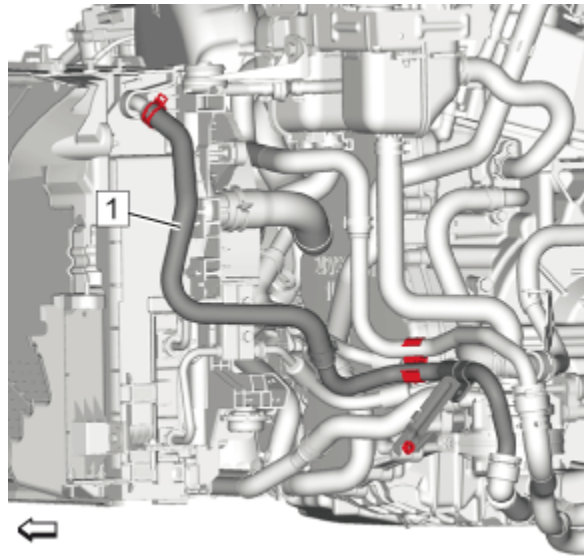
Drive Motor Control Module Radiator Outlet Hose
